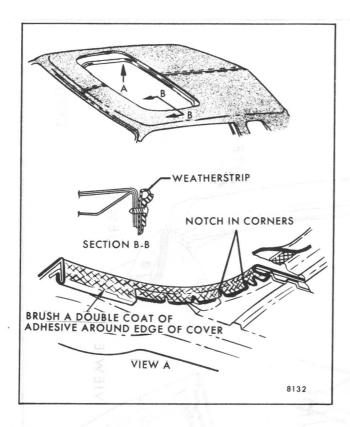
Fabric Roof Cover Installation - Sun Roof Option (CA1 or CO3)
